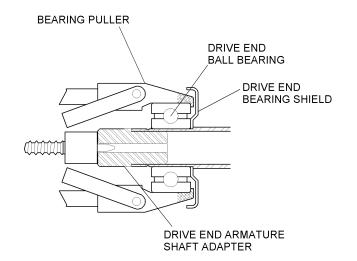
Ball Bearing and Drive End Bearing Shield
